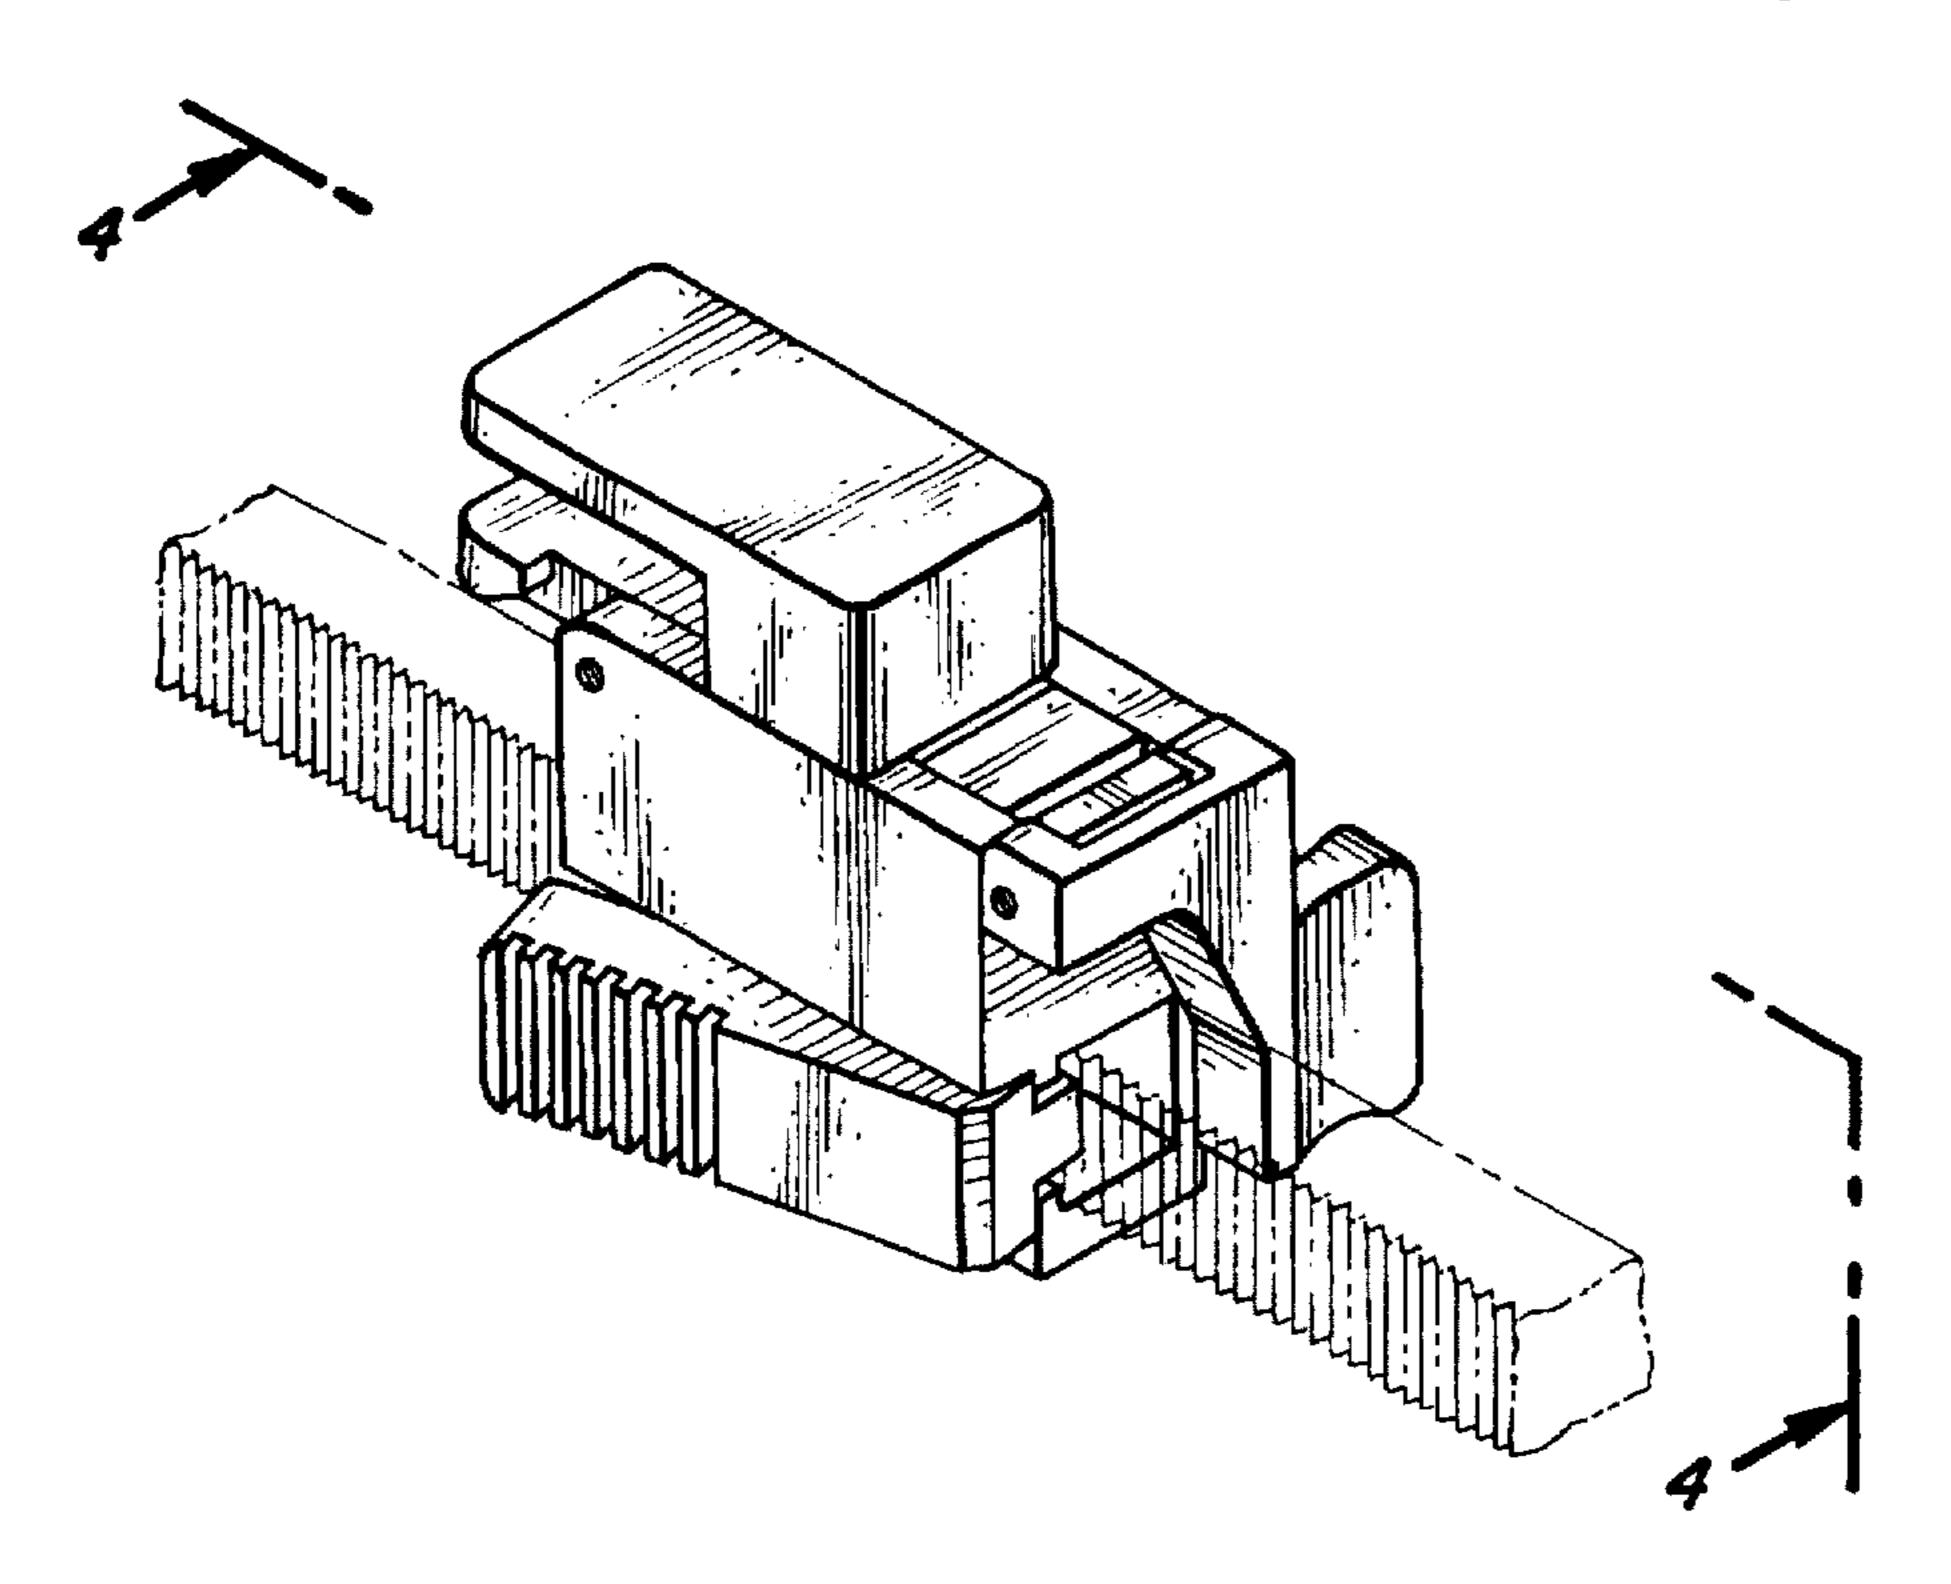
is a perspective view of the ratchet mechanism for a surgical retractor assembly in the open position;
